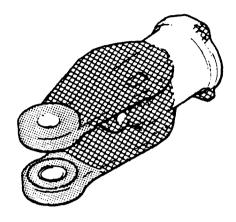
Replacement of Main Rotor Hub Grip Seals and Bearings
